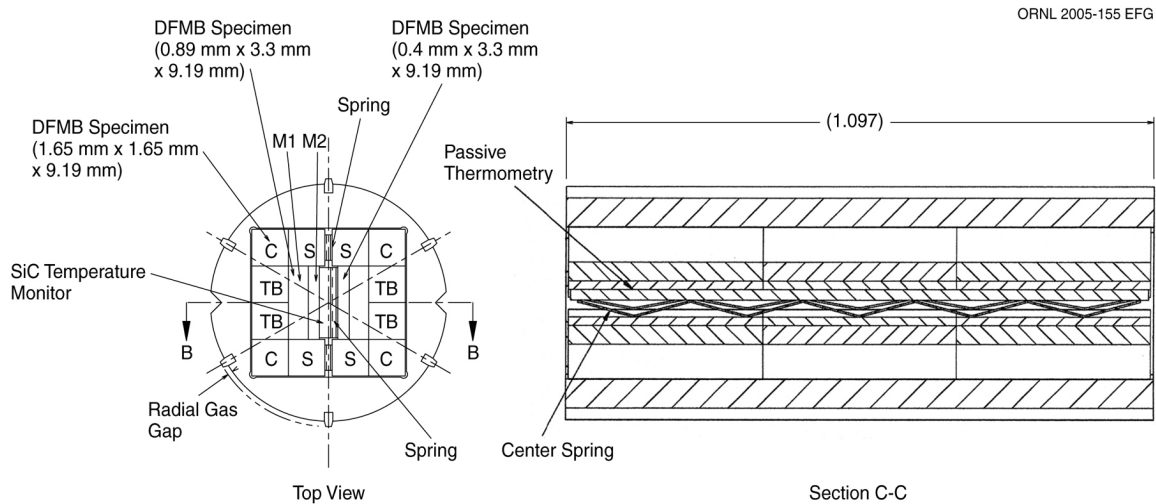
Specimen holder subassembly used for DFMB specimens.
